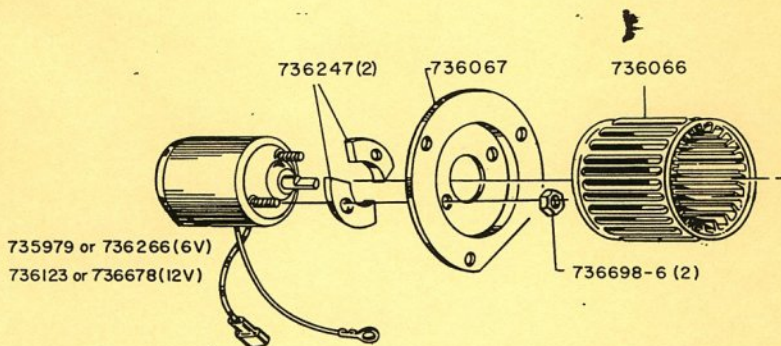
VENTILATING AIR BLOWER & MOUNTING PLATE ASSEMBLY 736065
